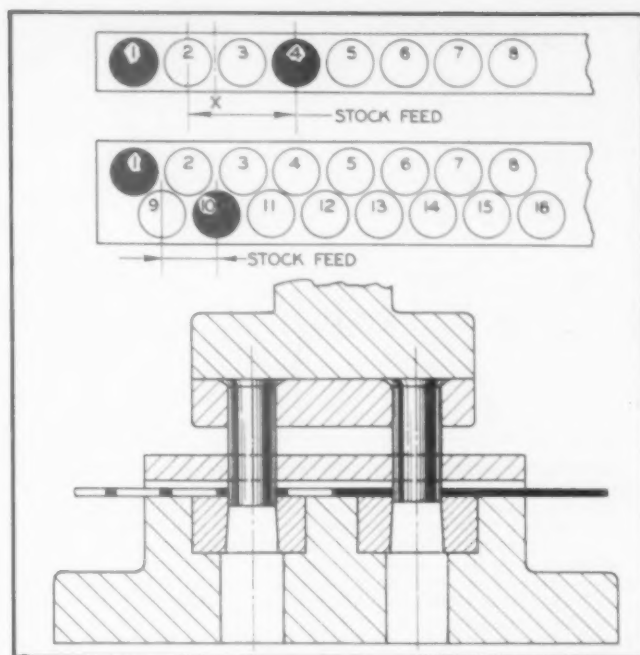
, showing—at bottom—a typical multiple cutting tool. The die openings are spaced to suit the stock layout, two examples of which are shown at top and center. For the first cut, the leading edge of the stock would be fed into the stock guide up to a feed stop. For layout A, blanks Nos. 1 and 4—shown sectioned—would be cut. The stock would then be moved the stock feed distance indicated and blanks Nos. 3 and 6 would be cut. The next stroke would cut 5 and 8, and so on, thus cutting every blank opening except No. 2. In order to cut No. 2, a station stop located at X, and used for a first cut of one hole only, would be necessary. With small blanks cut from coil stock, this "lost hole" is often ignored. But, if the blanks are substantial in size, or if the stock is in the form of short strips, an effort is made to cut every blank space. A more economical arrangement for a circular blank is shown at B. The first stroke of the press would cut blanks 1 and 10, the next stroke 2 and 11 and so on. With this arrangement, a single tool could also be used by passing the stock through the tool twice. The first pass would cut blanks 1, 2, 3, and so on, one at a time. The stock would then be reversed and blanks Nos. 9, 11 and so on would be cut. However, the procedure should only be used when the stock is of substantial thickness, so that the resultant scrap frame from the first pass will be sturdy enough to stay straight and not kink or break when given the second pass.
